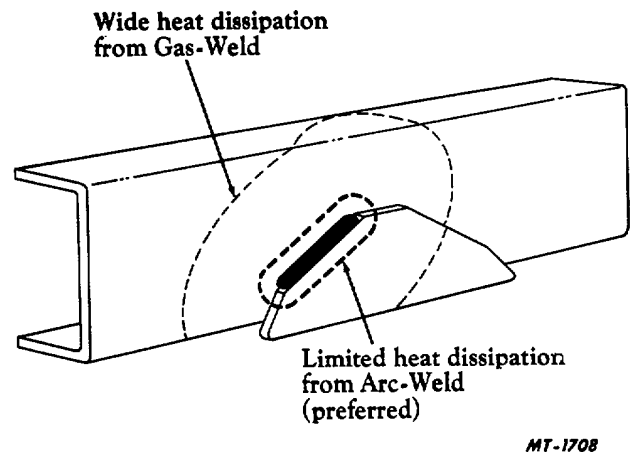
Weld Sample Showing Lower Heat Dissipation Possible with Shielded Arc Welding.
